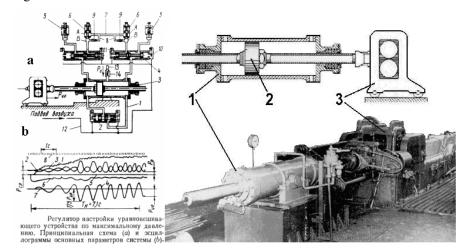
Detail of the main power line mill HPT-32-2: 1-cylinder balancing device; 2-the piston(plunger); 3-mobile work stand
